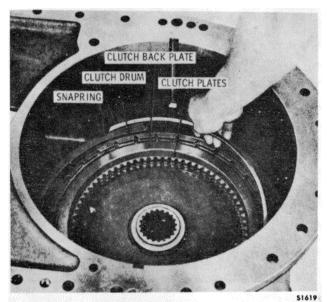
Removing Fifth-and-Sixth-Gear Clutch Backplate Snap Ring
